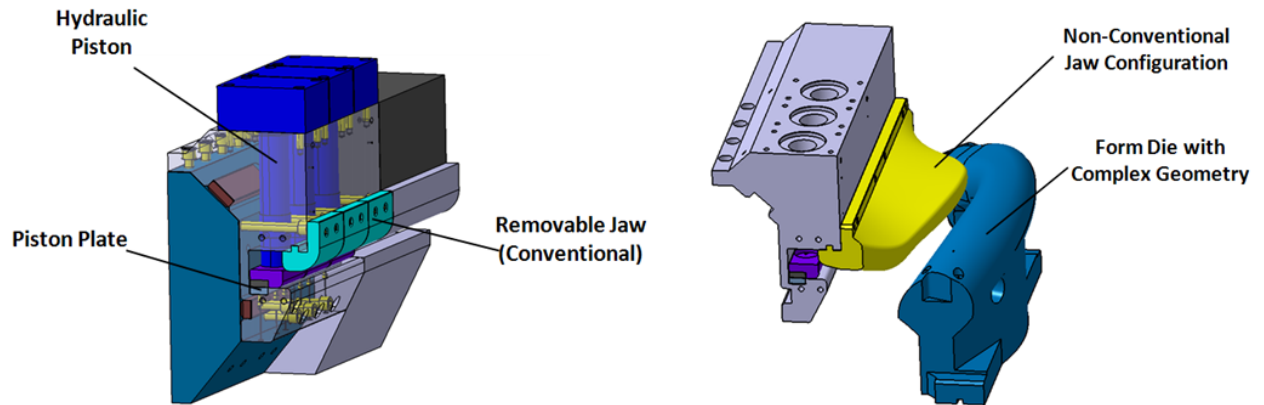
(a) CAD model of stretching jaws with conventional tools (b) CAD model of stretching jaws with non-conventional tools (it is used to form more complex parts)
